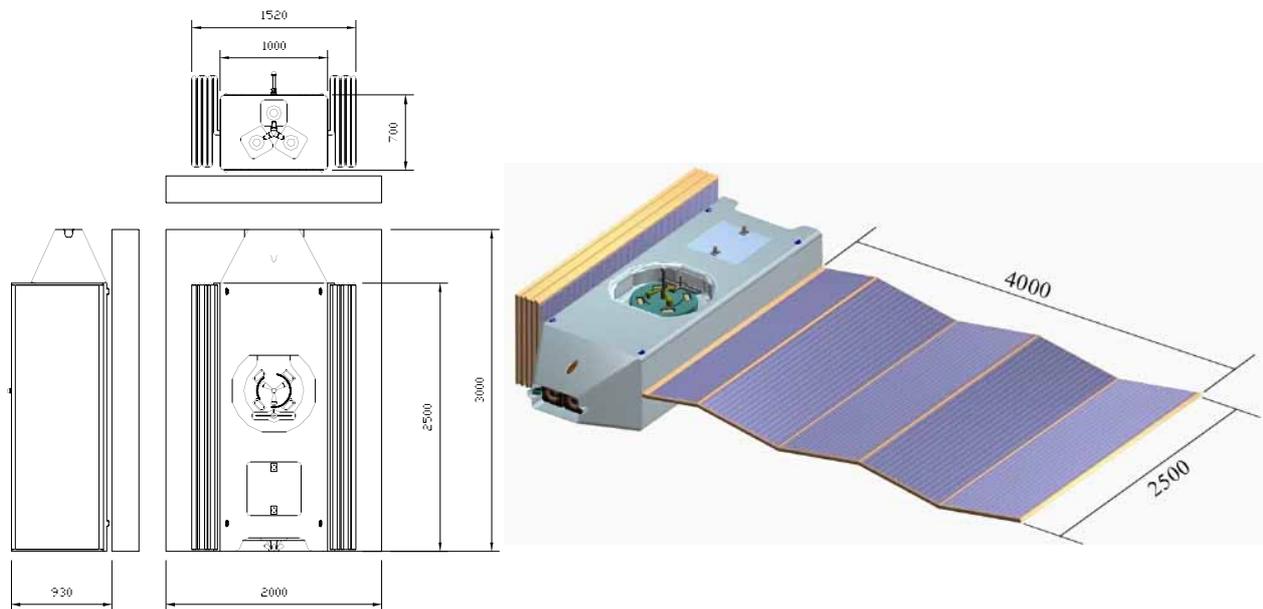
MOV dimensions (in mm) mounted on the Express Pallet platform, left; MOV solar array dimensions (in mm) with port array deployed, starboard array folded (right)
